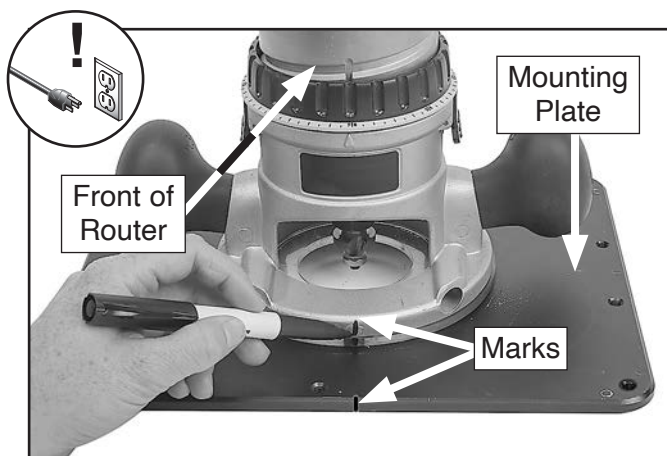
Marking center of router base, router base plate, and mounting plate with spindle.
